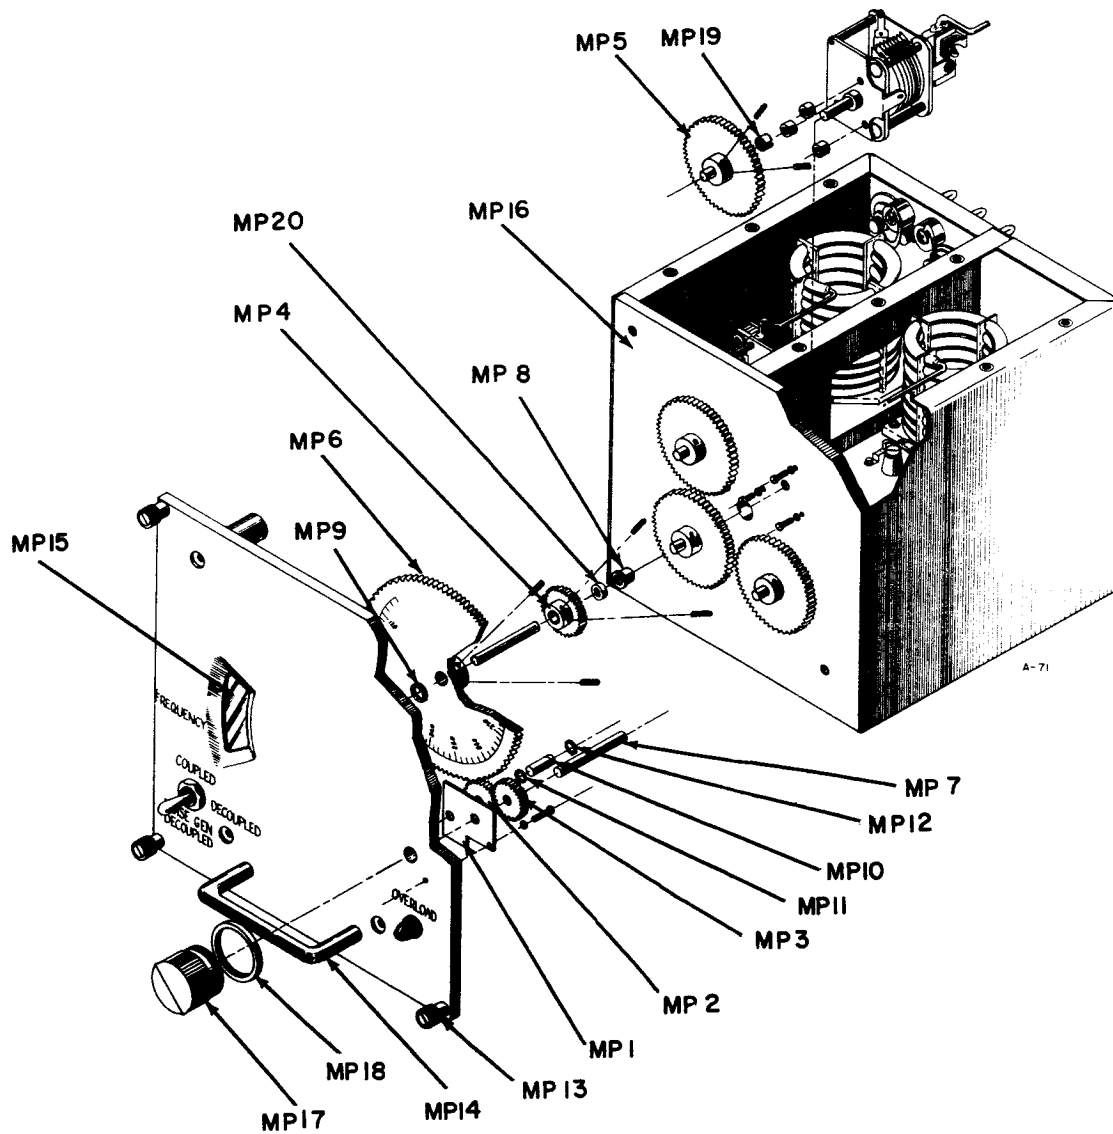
MECHANICAL PARTS IDENTIFICATION
